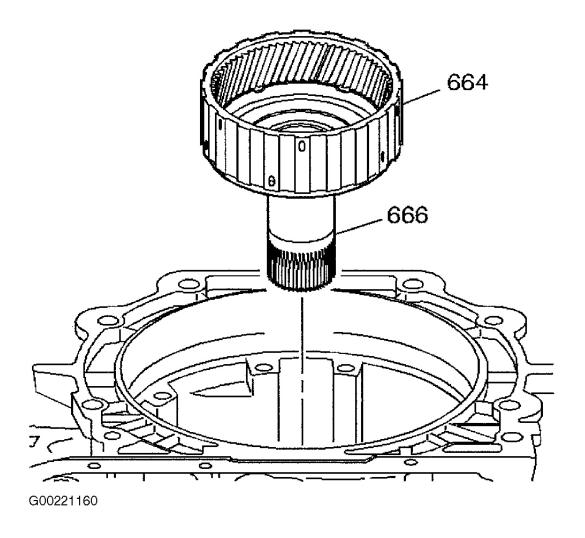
Removing/Installing Input Internal Gear & Reaction Carrier Shaft Assembly
